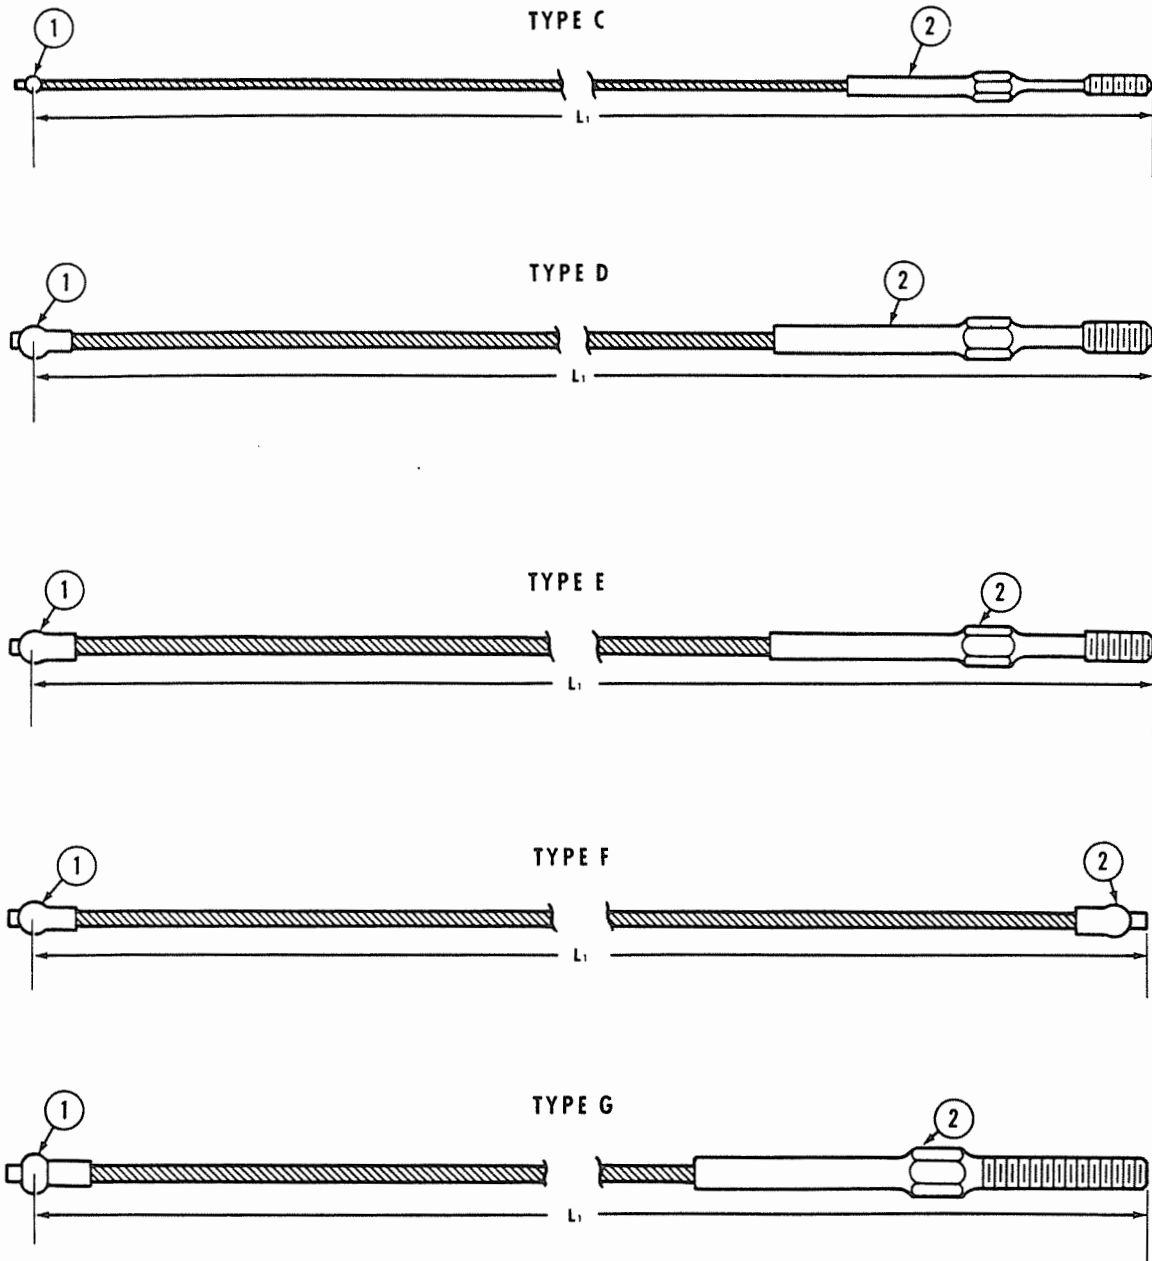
(Sheet 5 of 5 Sheets). Automatic Pilot Control System – Cable Assemblies
